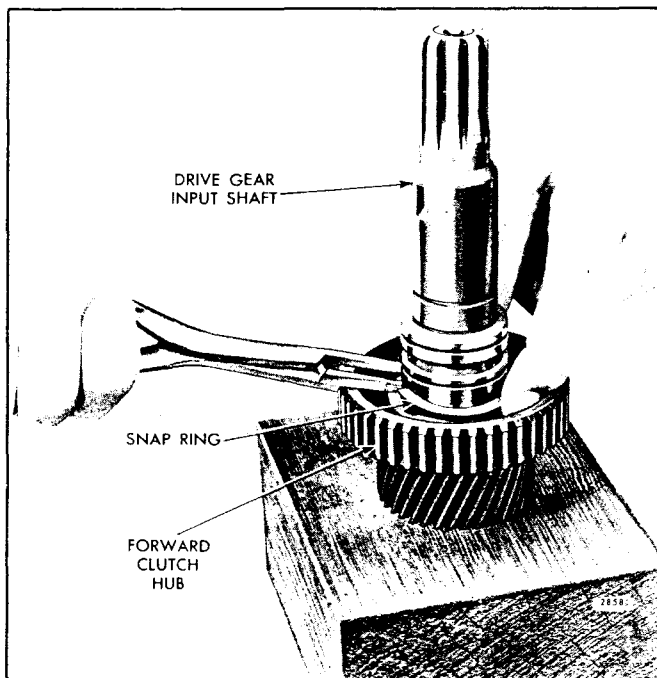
Removing or Replacing Forward Clutch Hub Snap Ring
